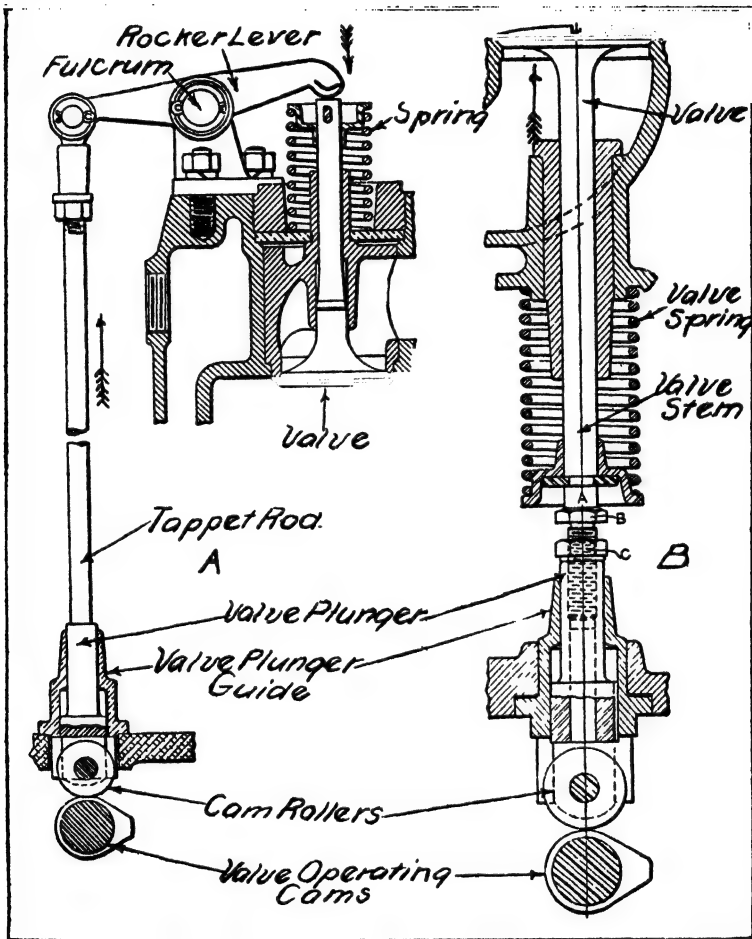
Conventional Methods of Operating Internal-Combustion Motor Valves.
